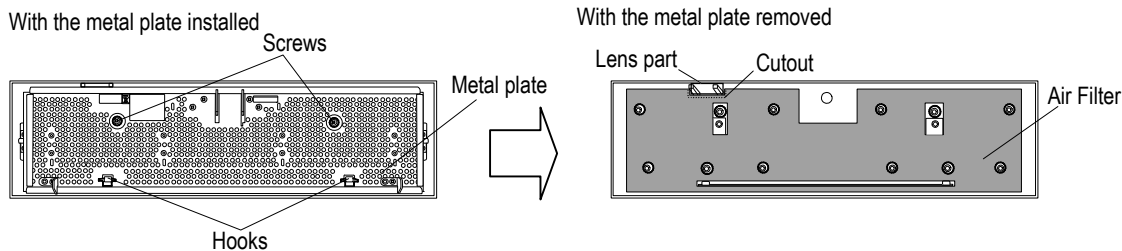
Parts Locations on the Front Bezel Back Side
